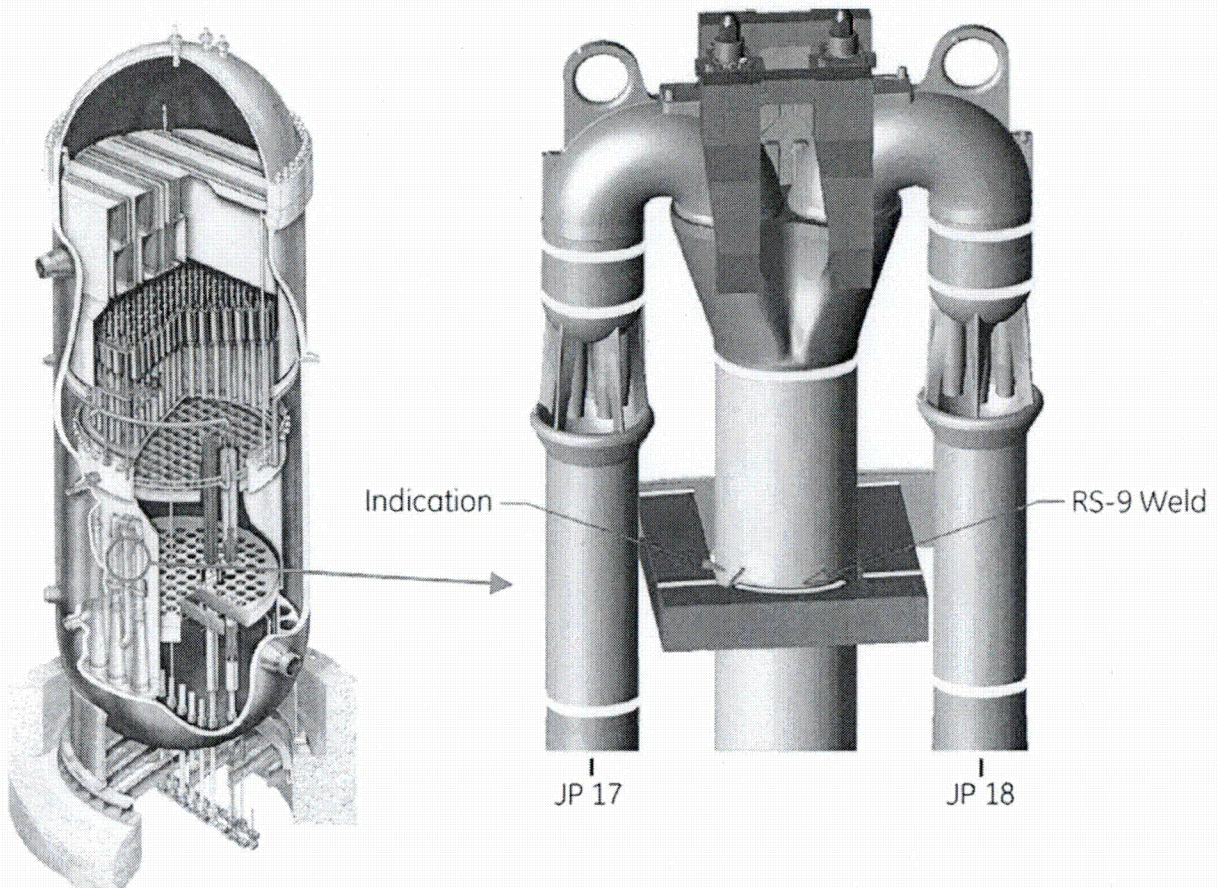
Schematic of JP-17/18 Riser Pipe Crack Indication (Reference 2)
